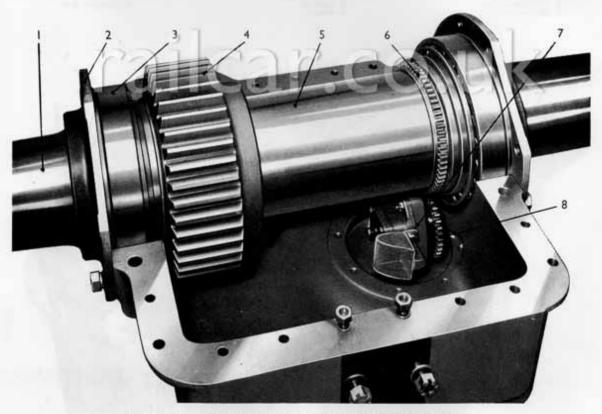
VIEW OF AXLE MOUNTED IN BOTTOM PORTION OF GEARCASE
